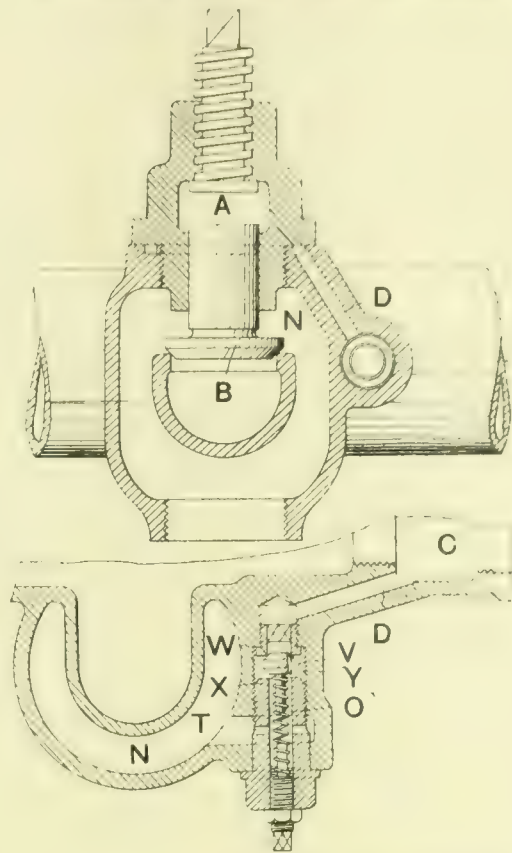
VALVE ARRANGEMENTS FOR INJECTORS.
